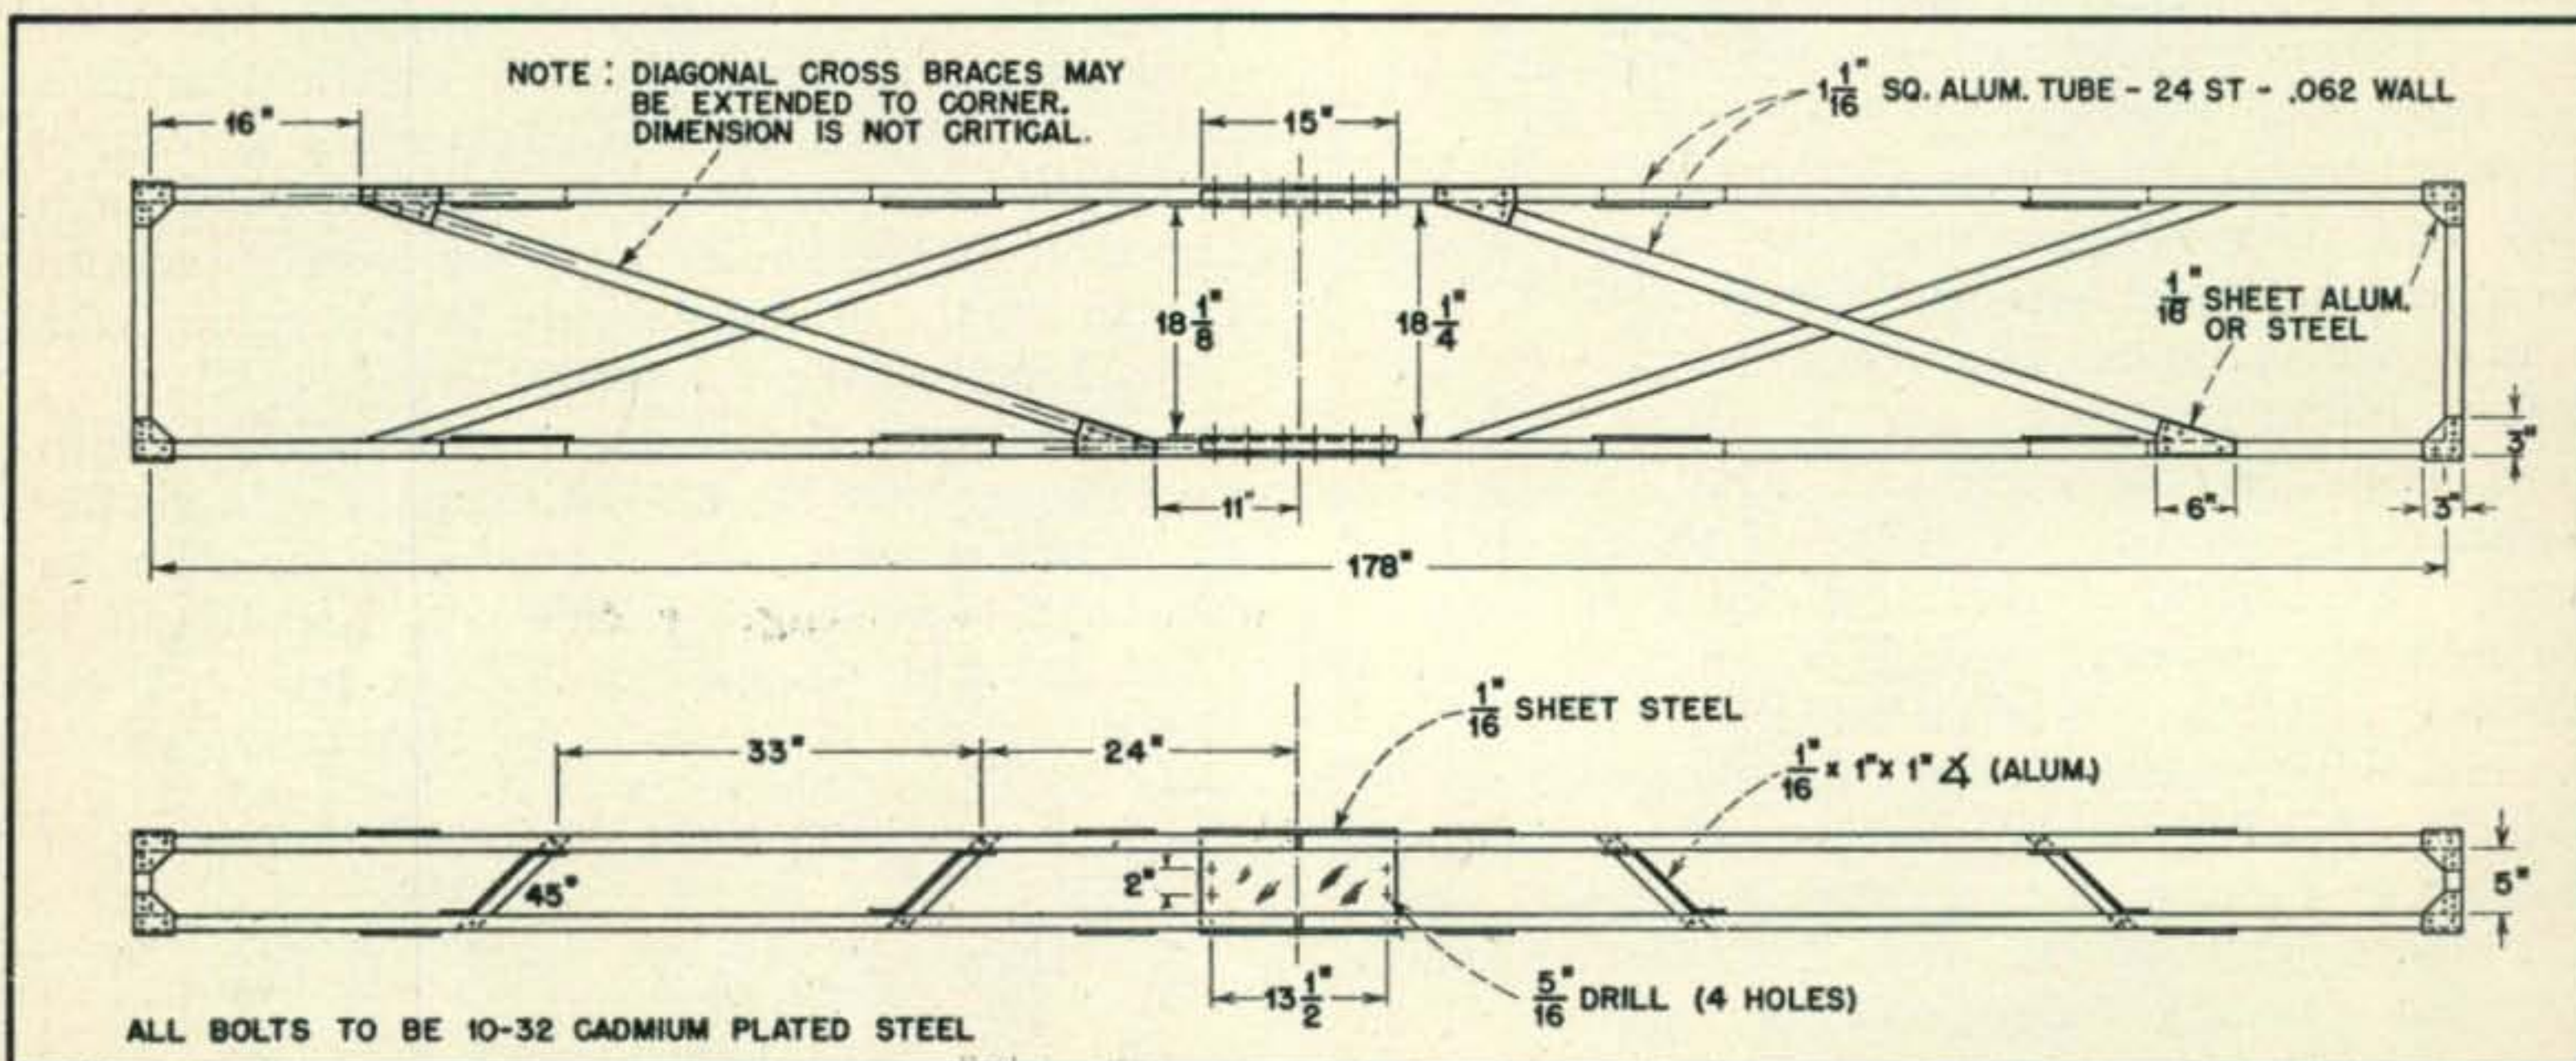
Mechanical drawing of the boom. The two 7' halves comprising the boom are fastened to the sheet steel center plate by six 10-32 cadmium plated  $1\frac{3}{4}$ " steel bolts both top and bottom. The bolts are locked in with lock washers and locking nuts. Variations of the dimensions given may be required for different types of rotators.
